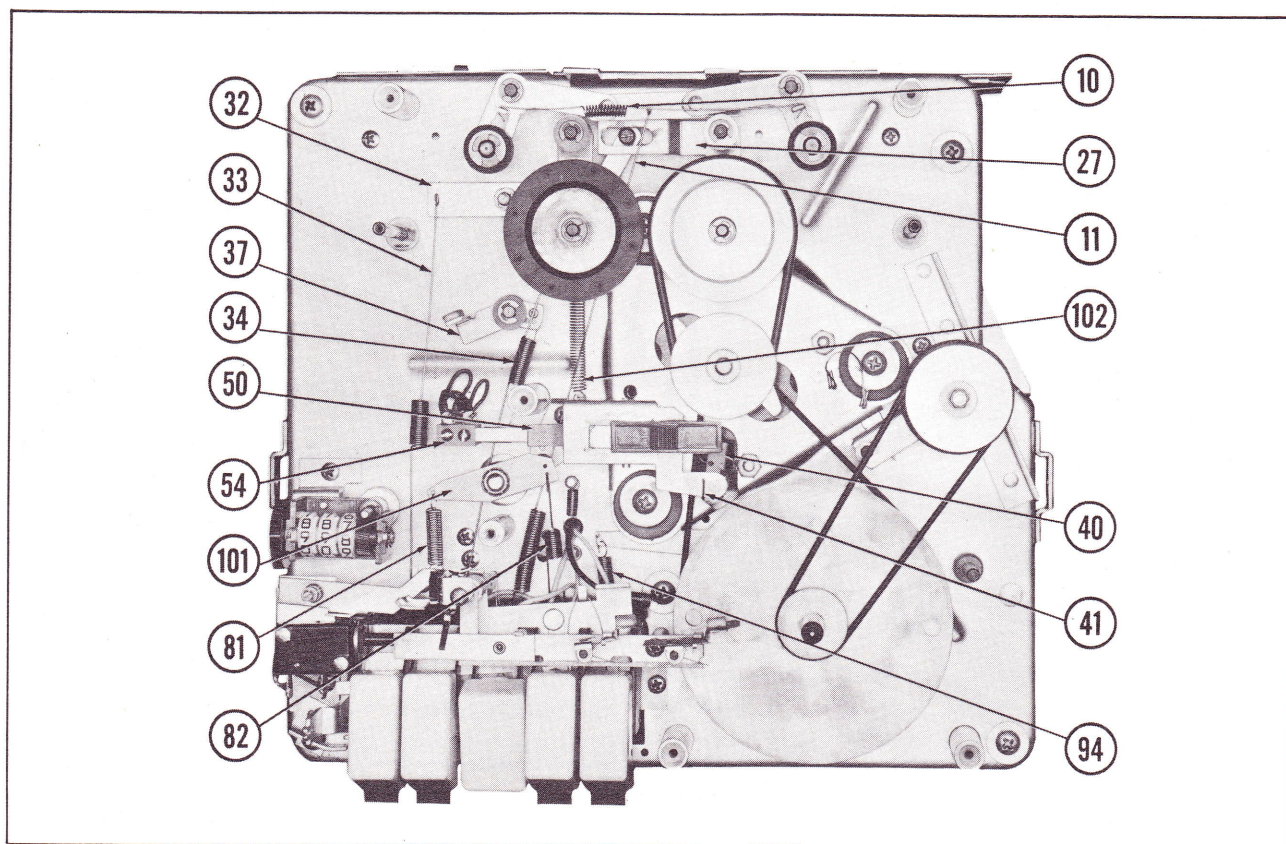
Top View Of Mechanism With Reel Rests And Head Mounting Bracket And Guide Assembly Removed.
